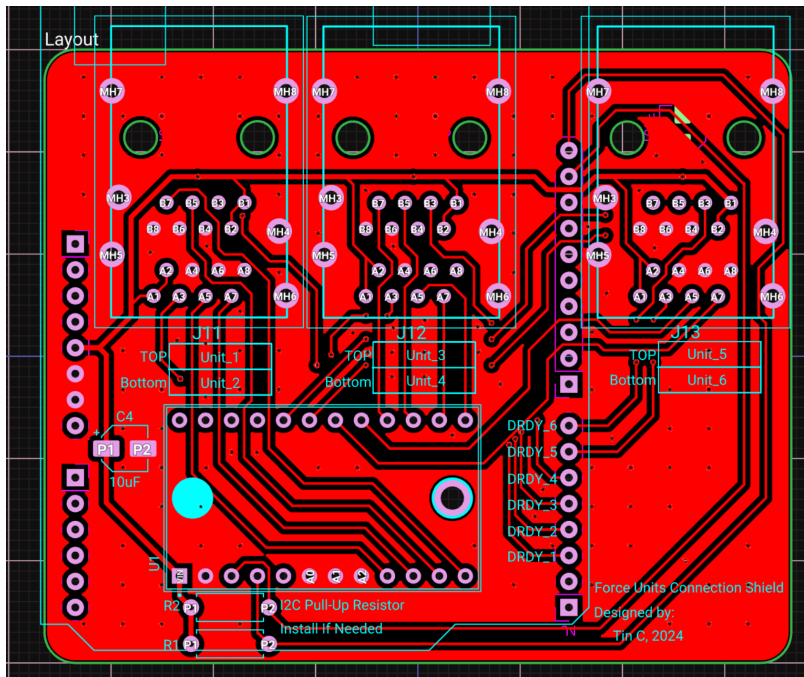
Force Sensor System Arduino Shield Board Layout - Top Layer
